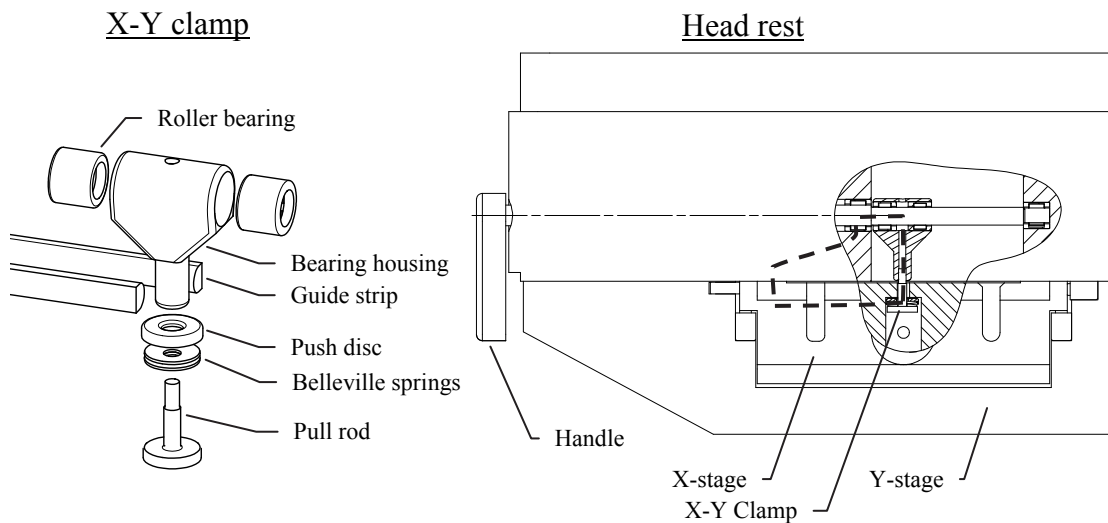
/ Fixation of the X-stage. On the left in exploded view, the X-Y clamp and two guide strips. On the right, a cutout view of the head rest assembly to visualize the X-Y clamp.
